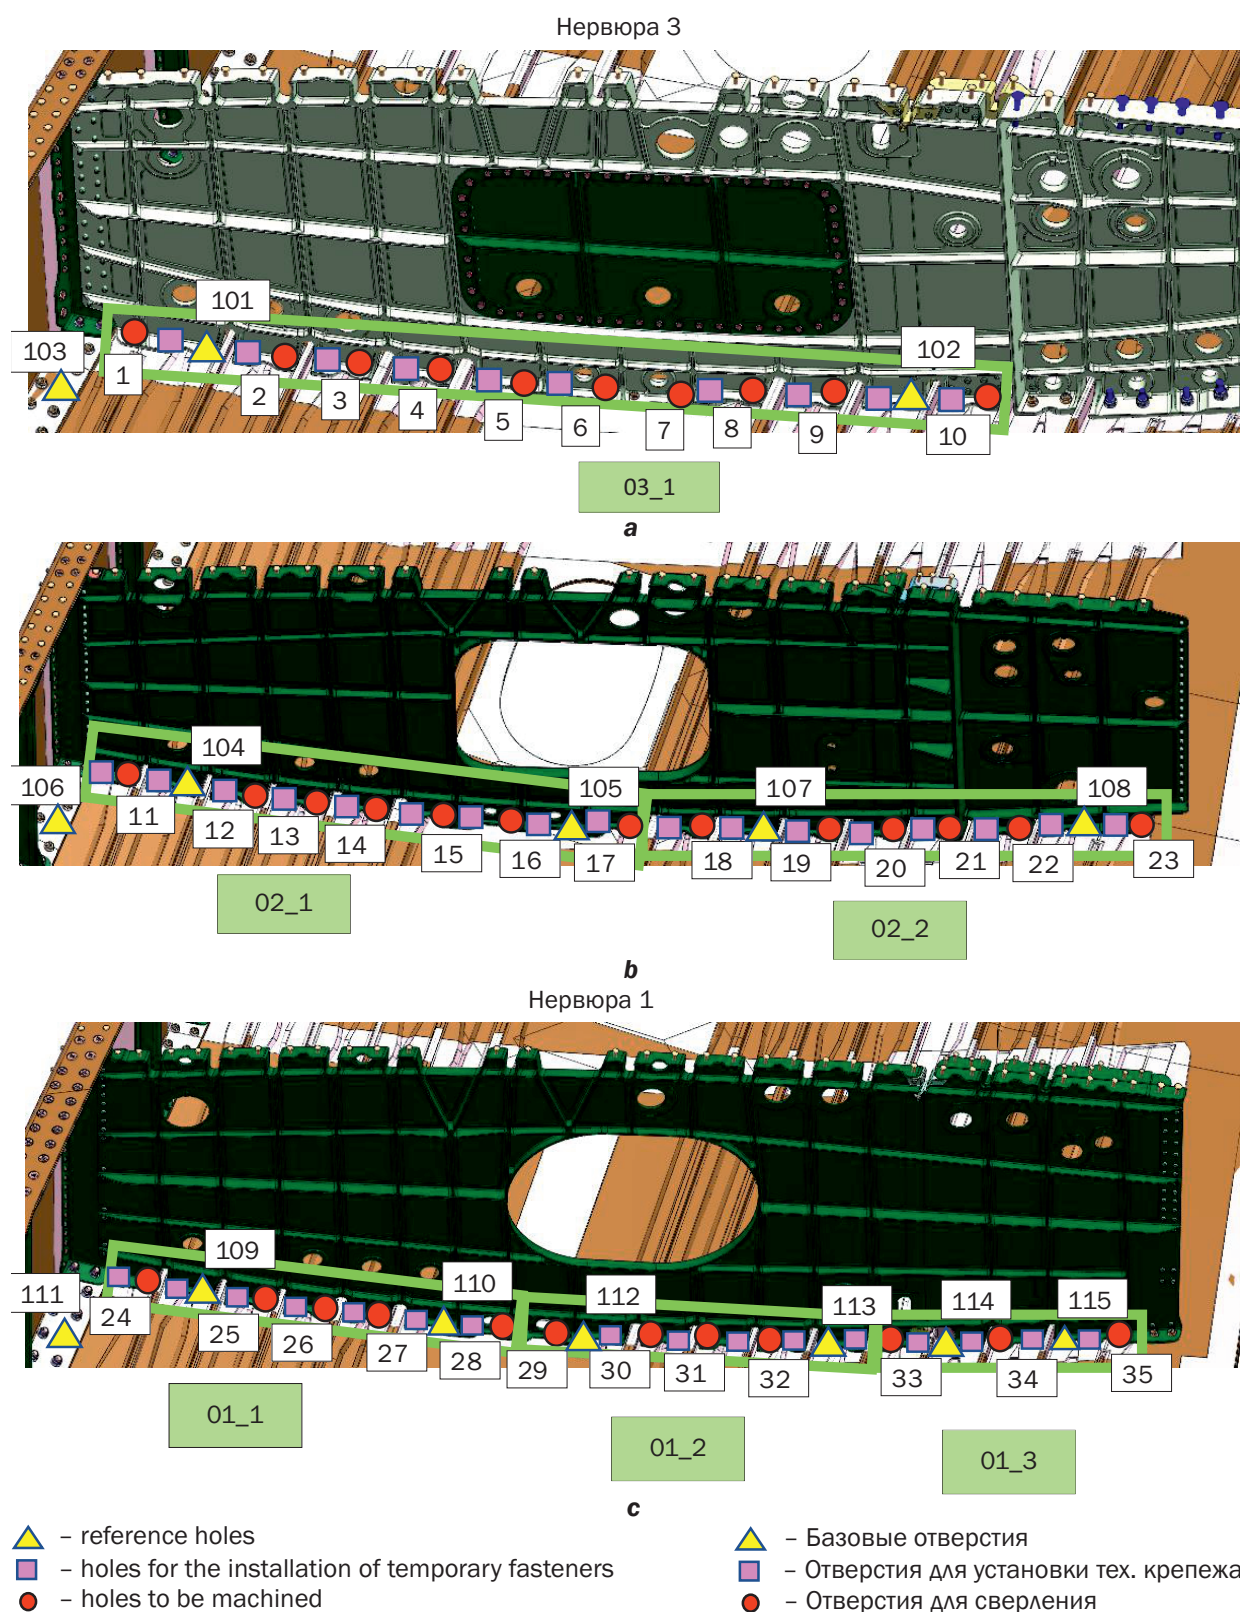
Layout of holes in the hole machining zones for wing box rib-type parts: a – rib 3; b – rib 2; c – rib 1
